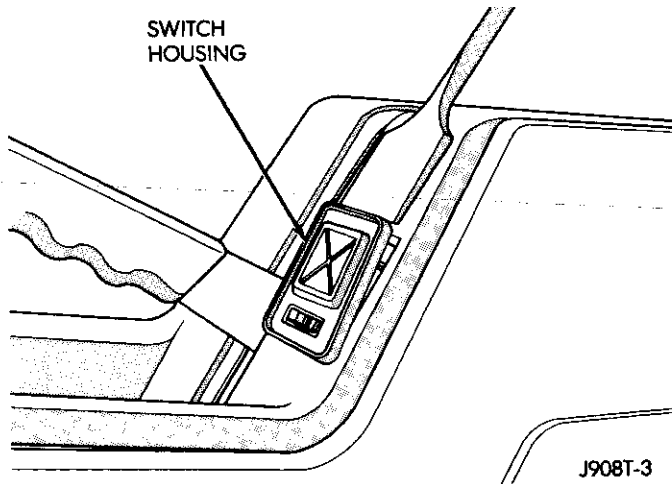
Power Mirror Switch Removal/Installation - XJ
